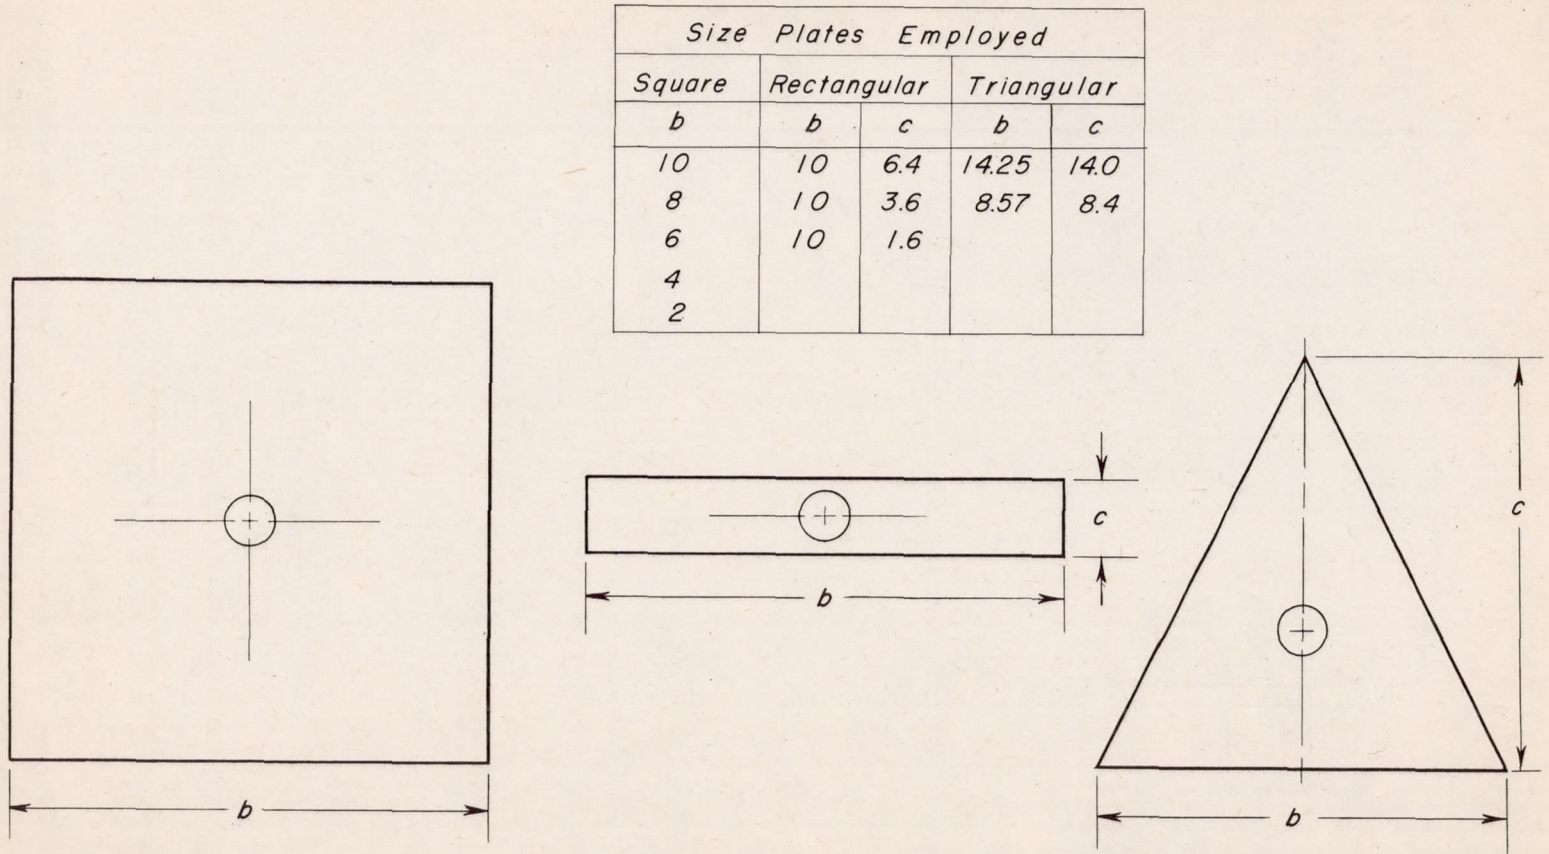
Size and shape of different flat plates tested. All dimensions are in inches.
